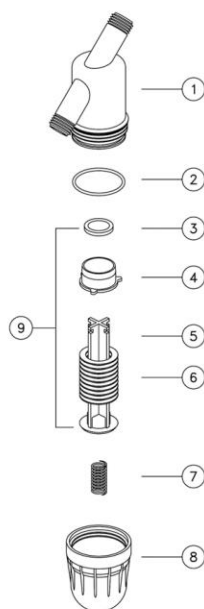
The pieces of filter within the casing that make up the disk filter, making it impossible to only replace the cartridge
